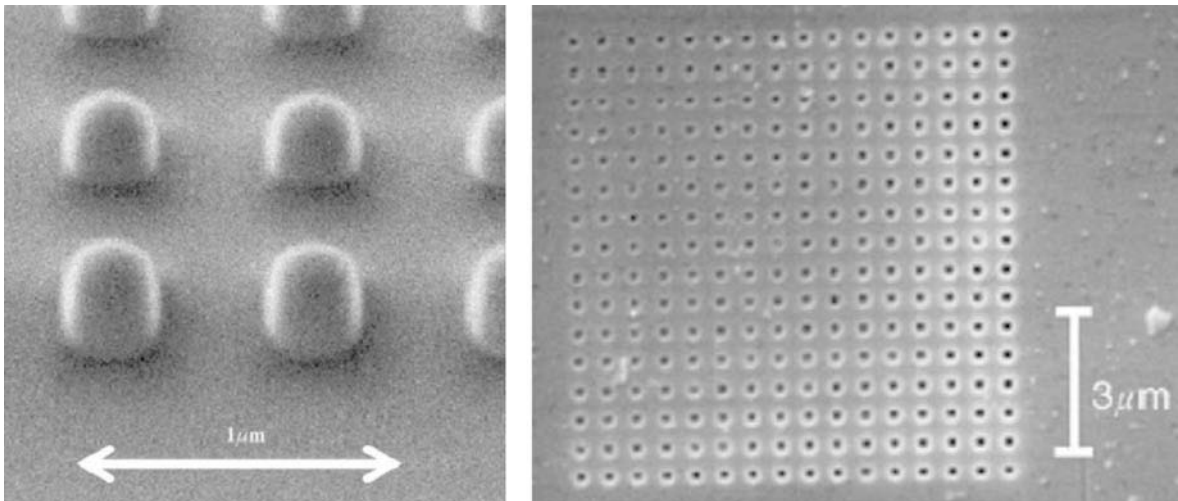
SEM images of: (left) nano-structured diamond tool produced by FIBs techniques, and (right) imprinted pattern on glass by the prototyped micro-molding tool.
